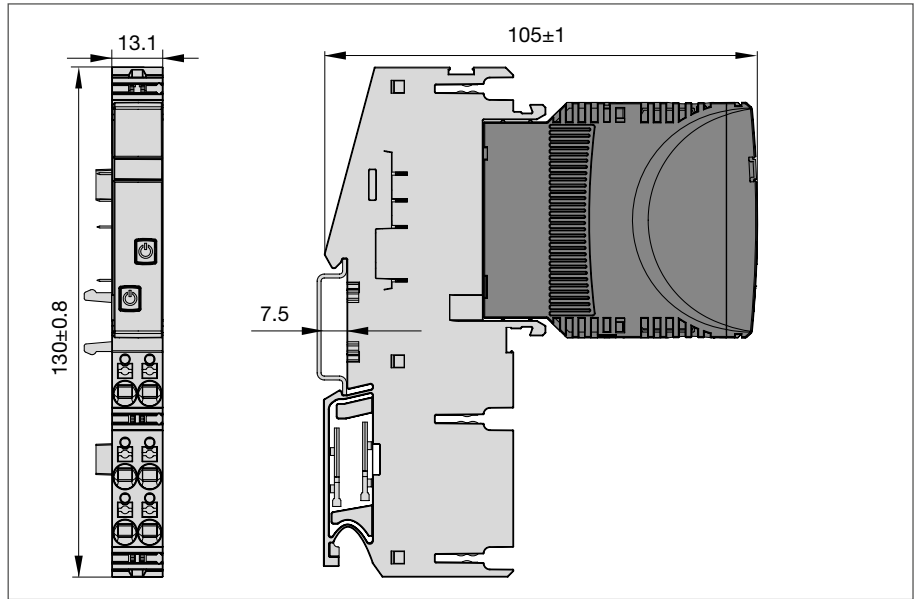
Dimensions of 18plus-AM03 connection module fitted with ESX60D
